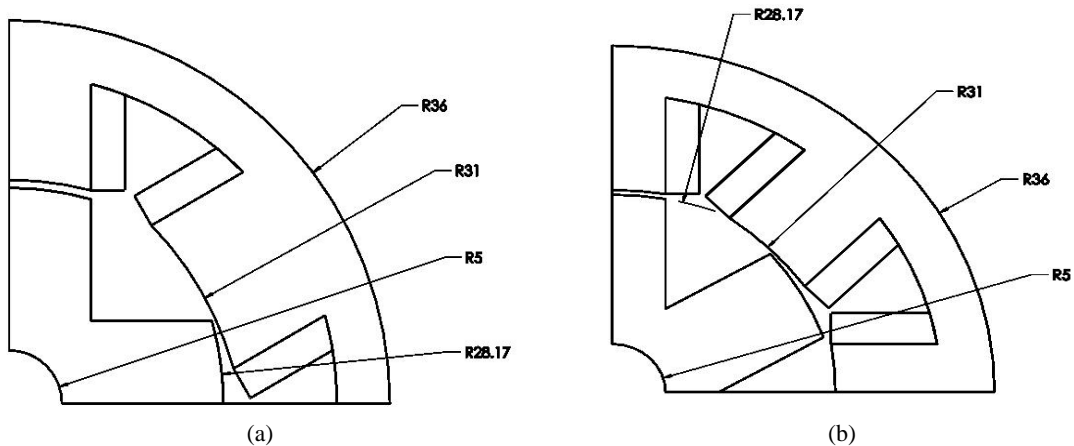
The geometry of the tested SRM with dimension (mm) (a) the 6/4 poles SRM (b) the 8/6 poles SRM
